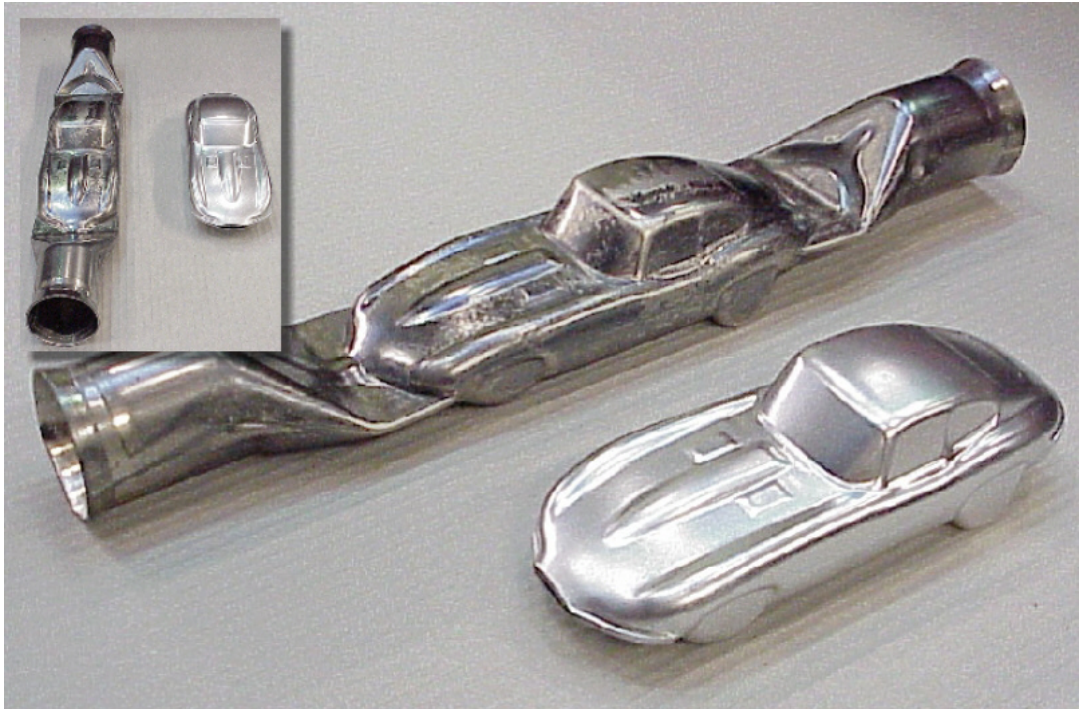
A product (key holder) manufactured by a new forming technology [4]
